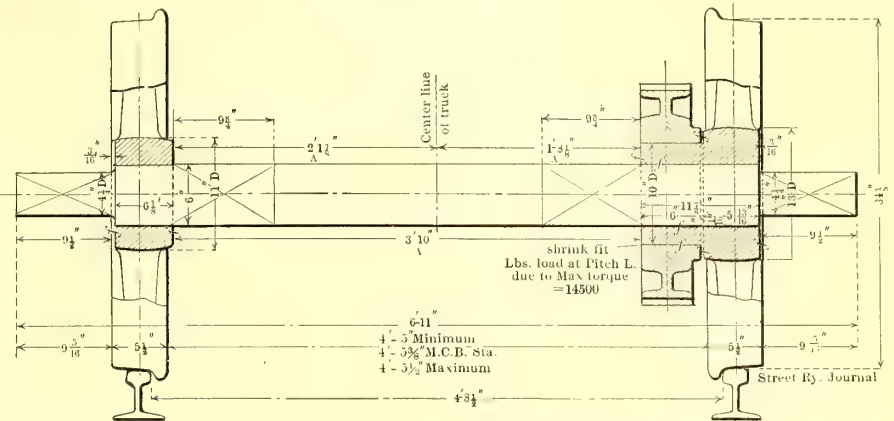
MOTOR AXLE, WHEELS AND GEAR—METROPOLITAN RAILWAY
